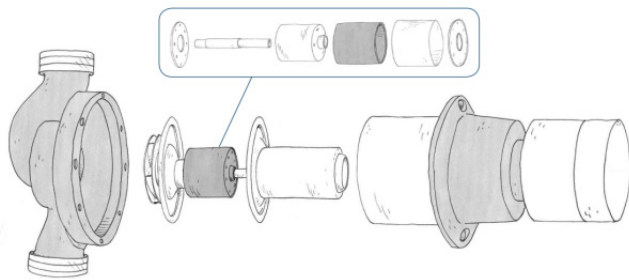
Exploded view of a Sintex magnetic rotor in a circulation pump.
